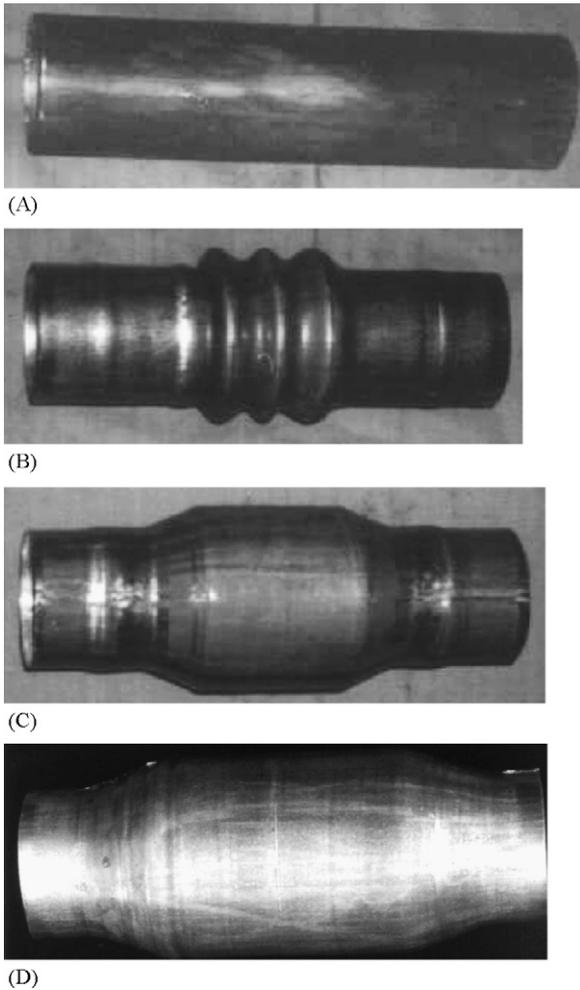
Different forming stages. (A) Tube blank; (B) useful wrinkles in pre-forming stage; (C) pre-formed part; (D) finally formed part.
